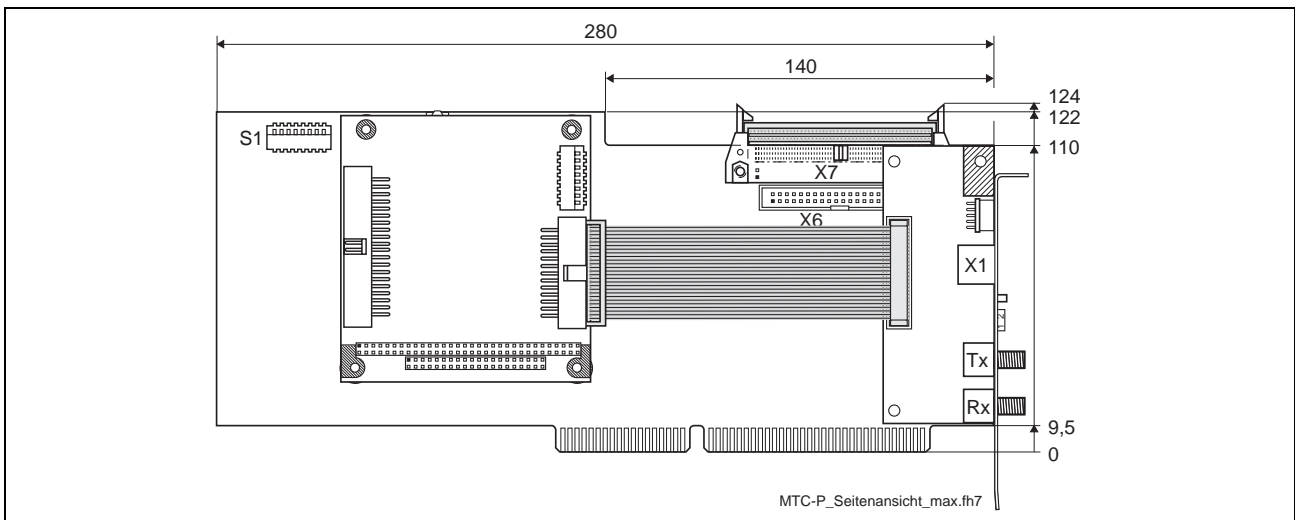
Dimensions of MTC-P01.2 with axis processor modules: Side view
